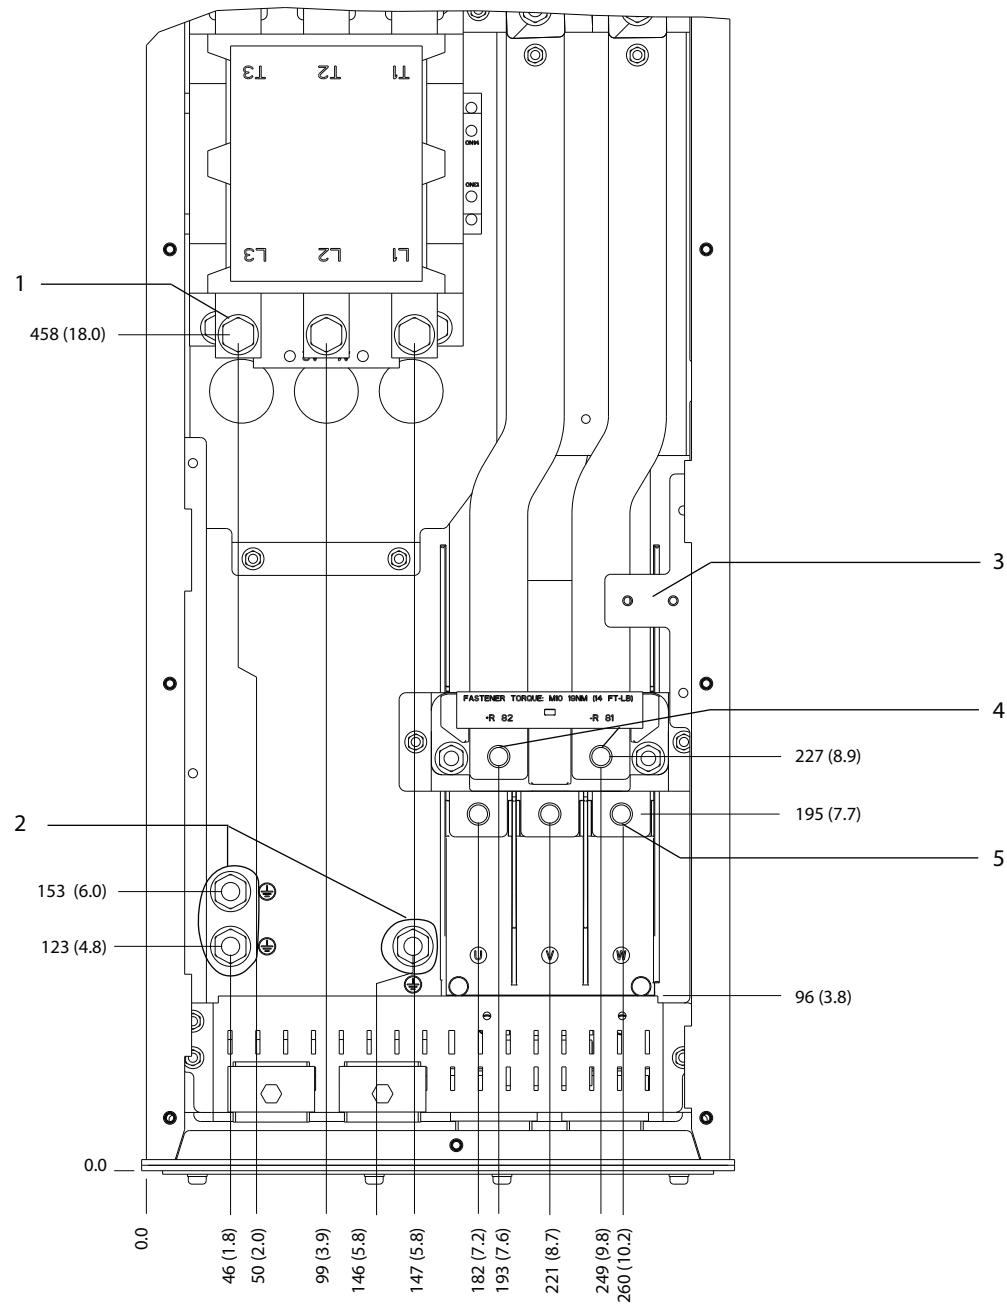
D5h Terminal Dimensions with Brake Option (Front View)
